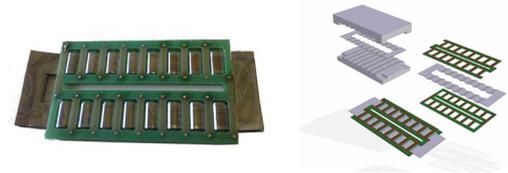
View of the meander topology : stamping molds, meander magnetic core and up and bottom Print Circuit Board (Aperam Imphy Alloys / G2Elab) and PCB integrated prototype.
